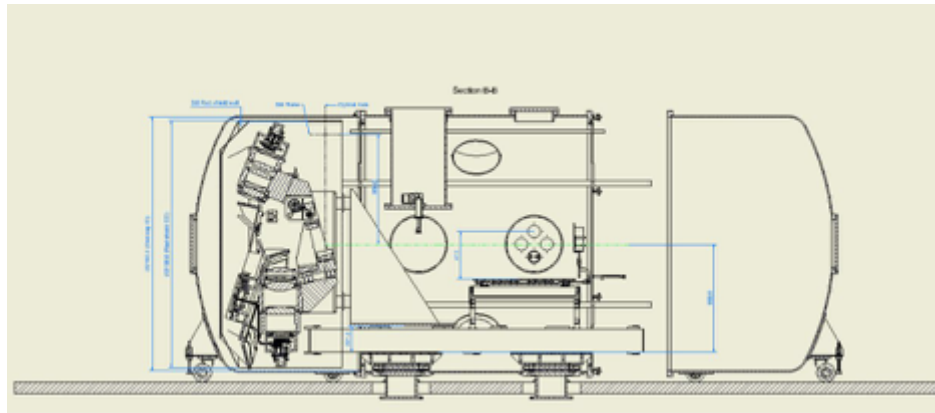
CAD drawing of the 2-Meter chamber showing the engineering model mounted in the left end cap. The right end cap will be used for testing of the individual modules.
